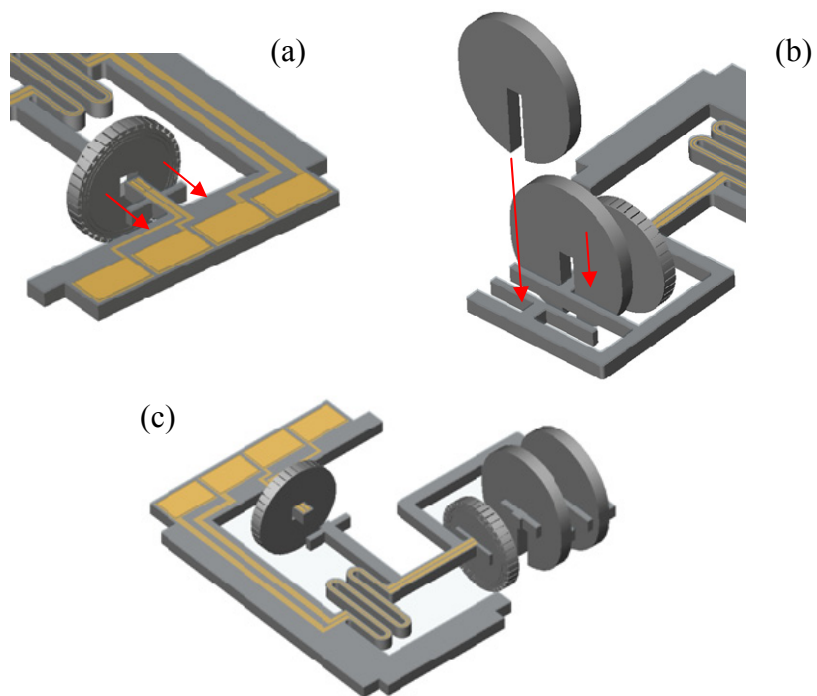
a) Assembly of the balloon discs. b) Assembly of the clamping discs. c) Frame with assembled discs (case of balloons with one disc).
